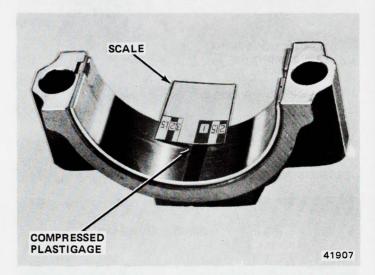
B-48 Bearing Clearance Measurement with Plastigage
